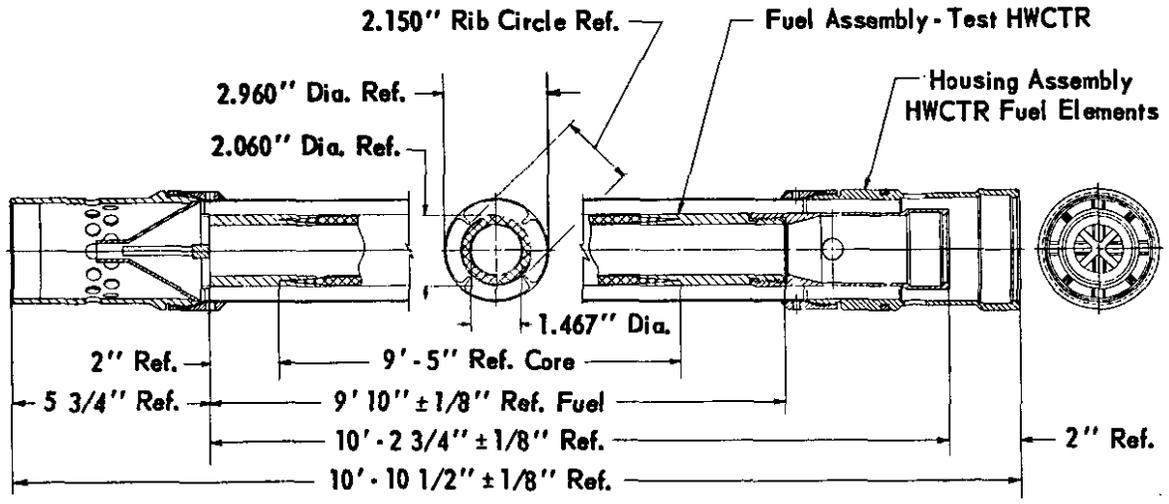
HWCTR TEST FUEL ASSEMBLY
